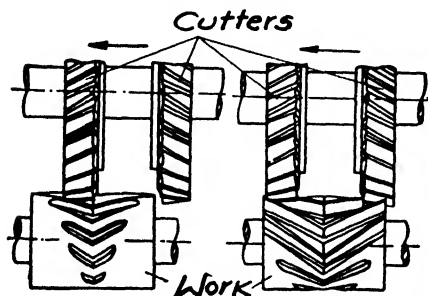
Cutting Continuous Tooth Herringbone Gears.
